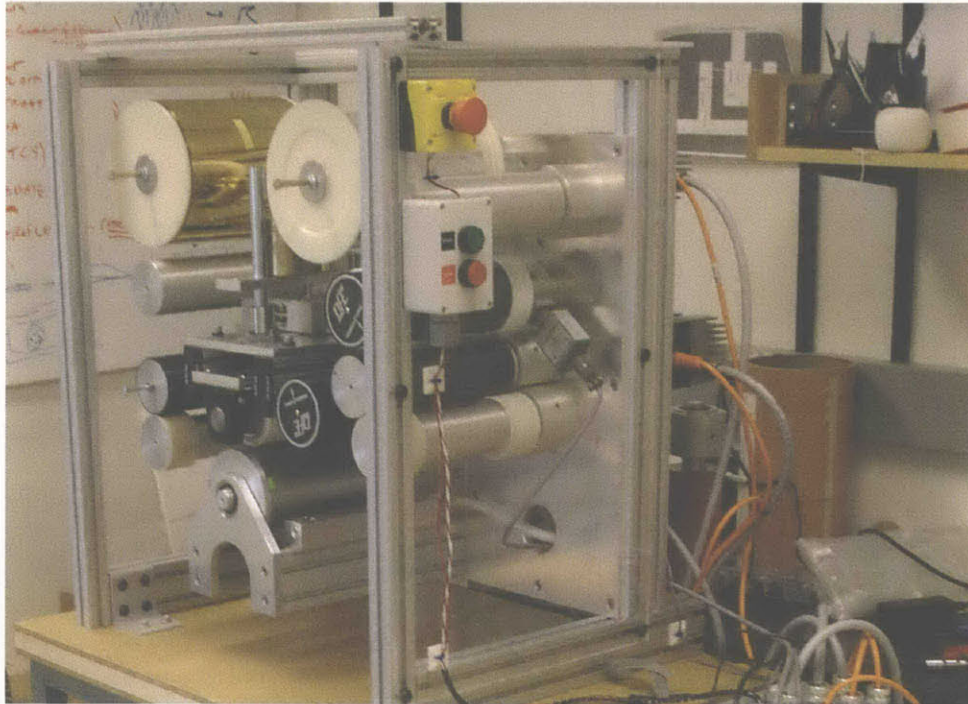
The roll-to-roll microcontact printing machine developed by Stagnaro. This machine achieved successful pattern transfer at web speeds of up to 400 feet per minute, but also demonstrated the need for a precision print head and a continuous stamp.
